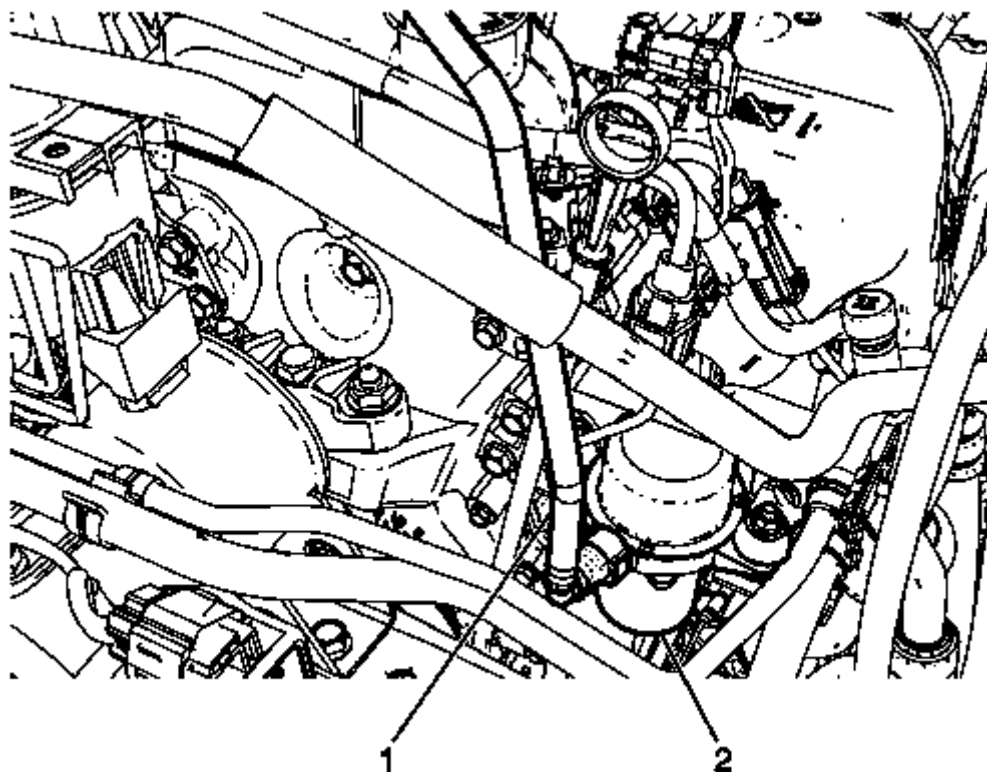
Vacuum Pump Hose And Vacuum Pump
